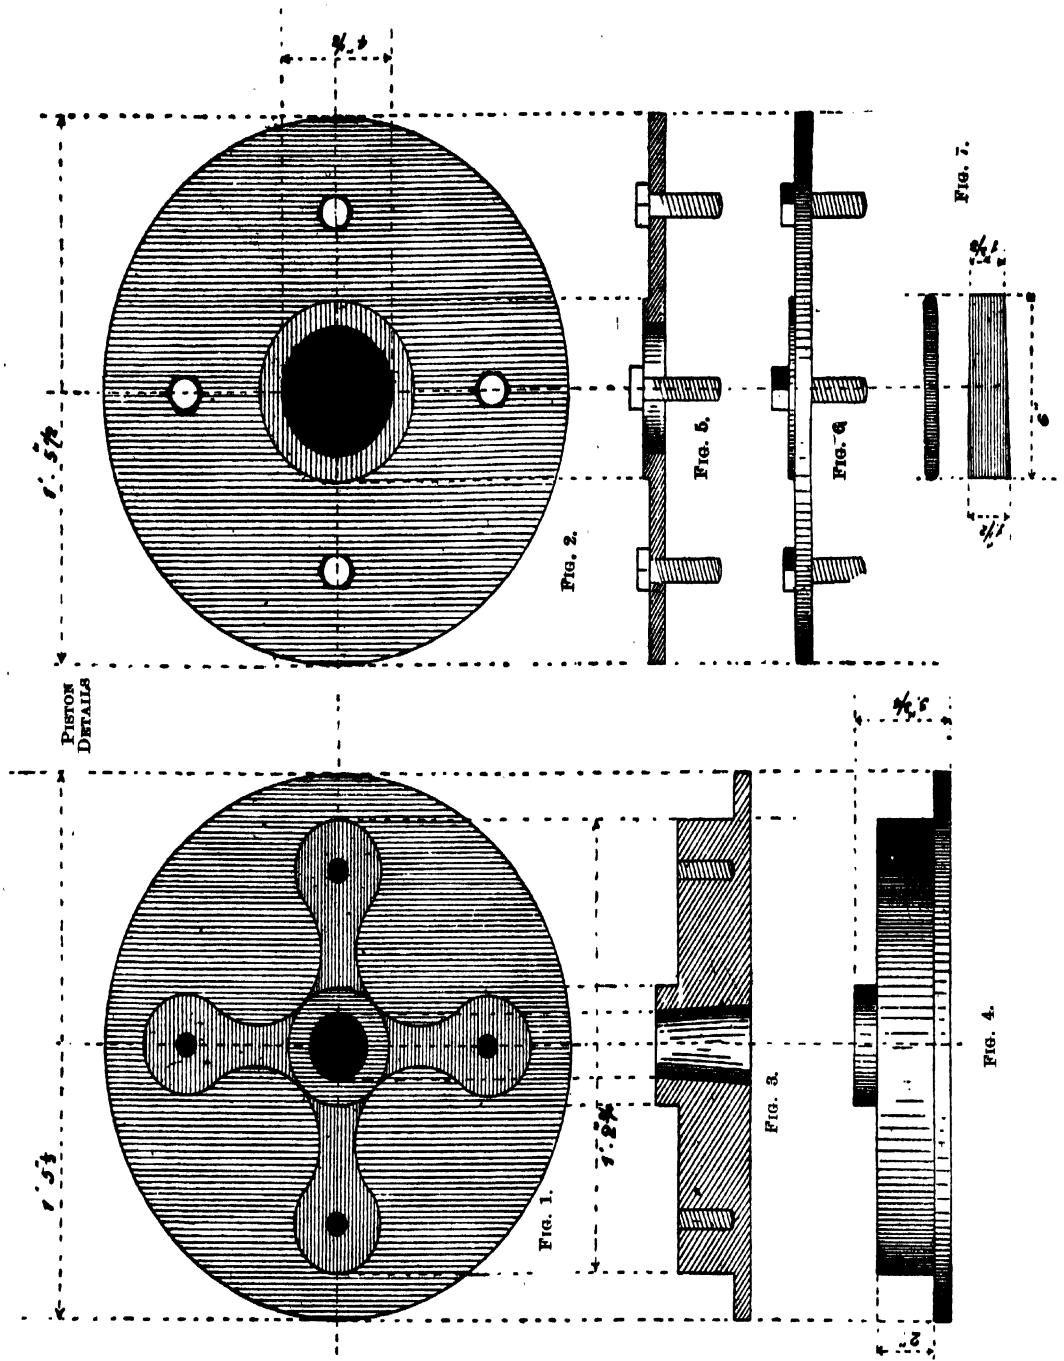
INSIDE PLAN OF PISTON.—FIG. 2. PLAN OF TOP (OUTSIDE).—FIG. 3. VERTICAL SECTION OF PISTON.—FIG. 4. SIDE ELEVATION OF PISTON.—FIG. 5. SECTION OF PISTON COVER.—FIG. 6. SIDE ELEVATION OF PISTON COVER.—FIG. 7. KEY OR COTTAR FOR PISTON ROD.
